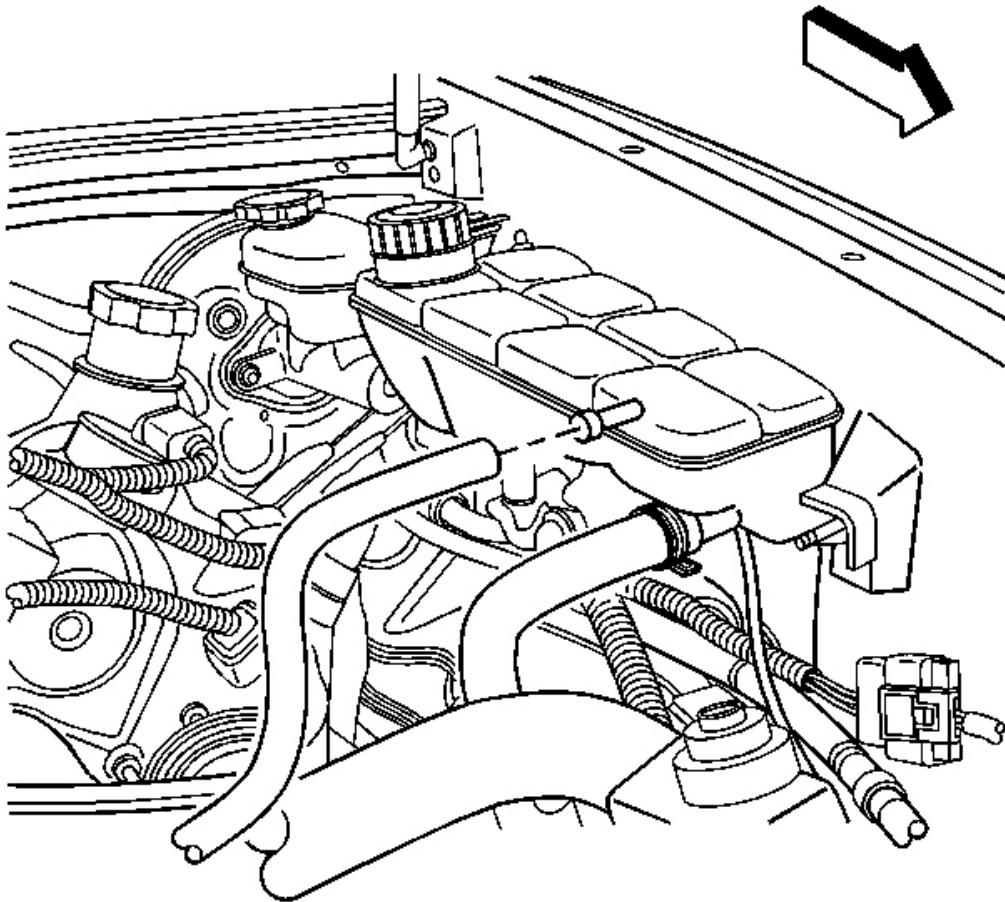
Repositioning Surge Tank Inlet Hose Clamp At Radiator
